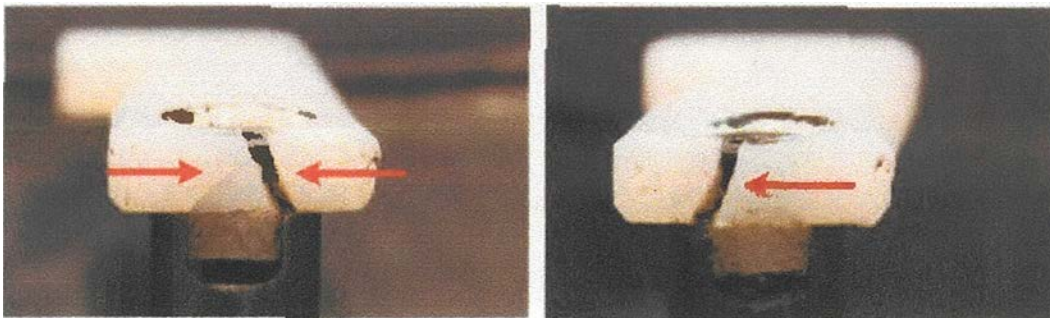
Cracked Safety Catches in the W76 Aft Disassembly Fixture, 076-2-0382 [26].
